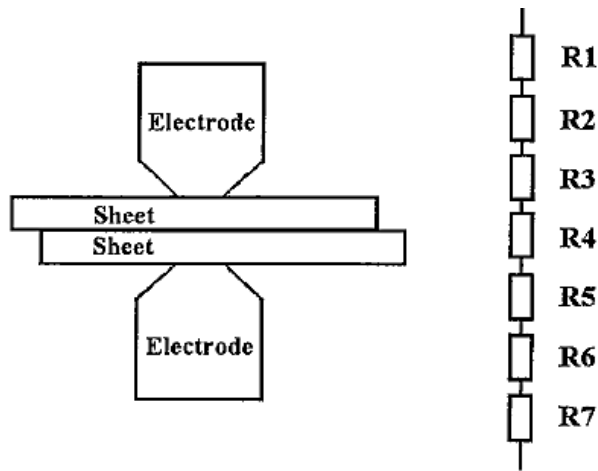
Stack-up resistance between welding electrodes [21]
